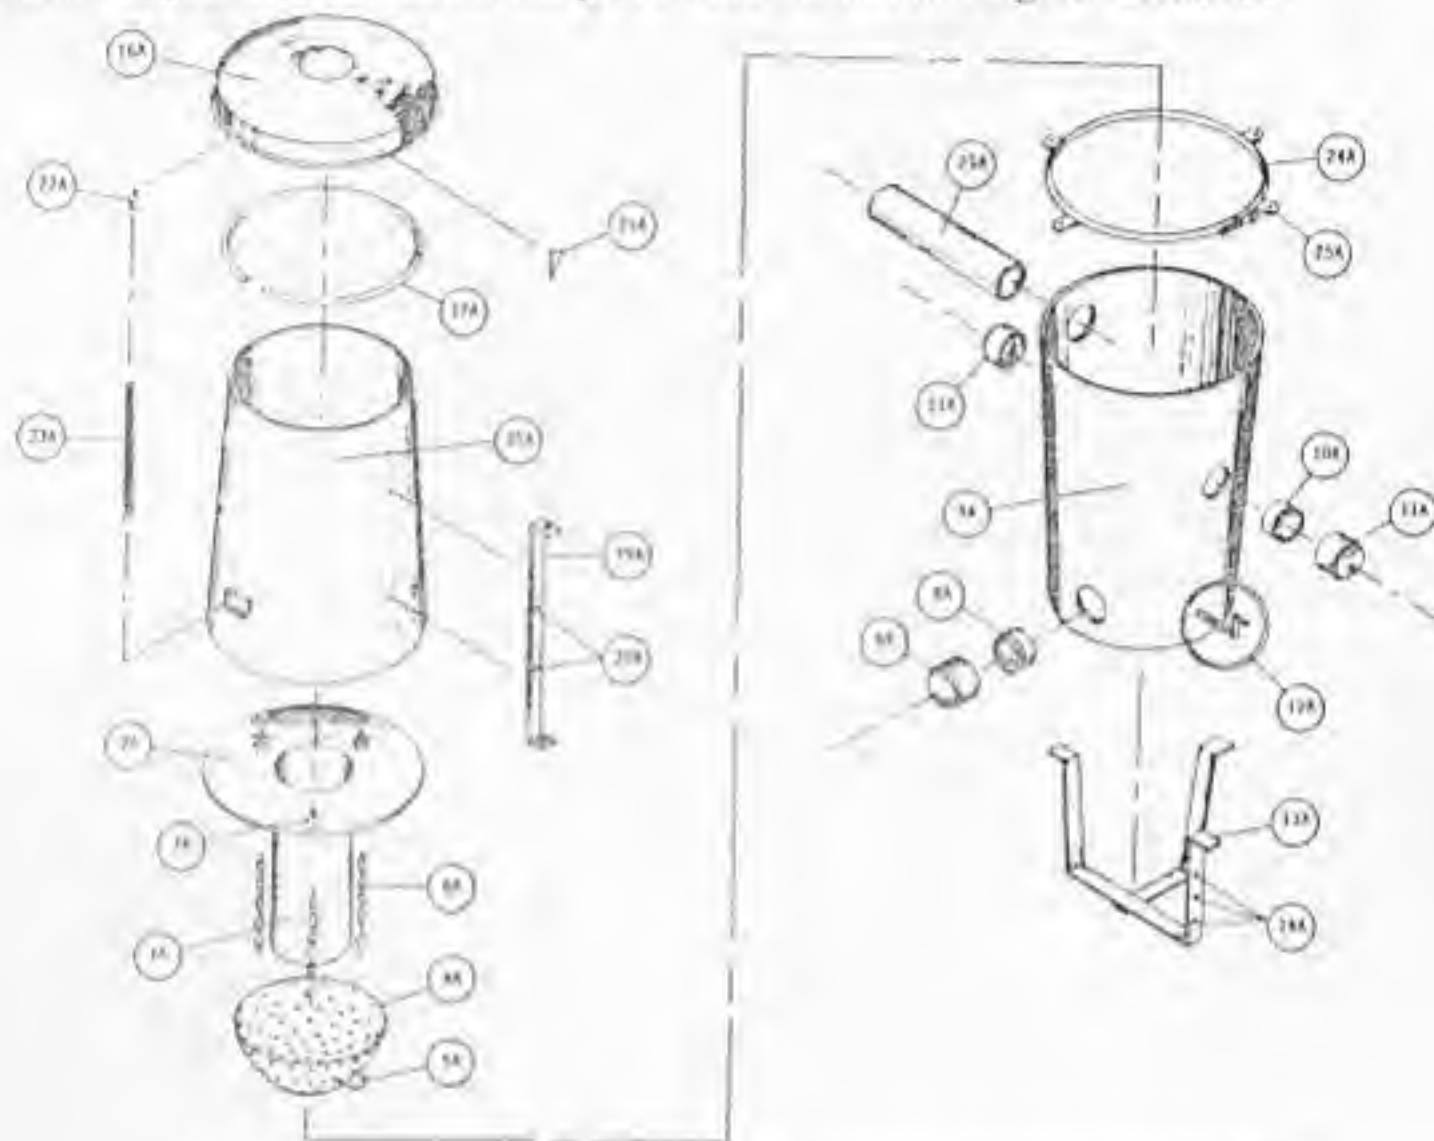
Exploded, schematic diagram of the wood gas generator unit and the fuel hopper.
